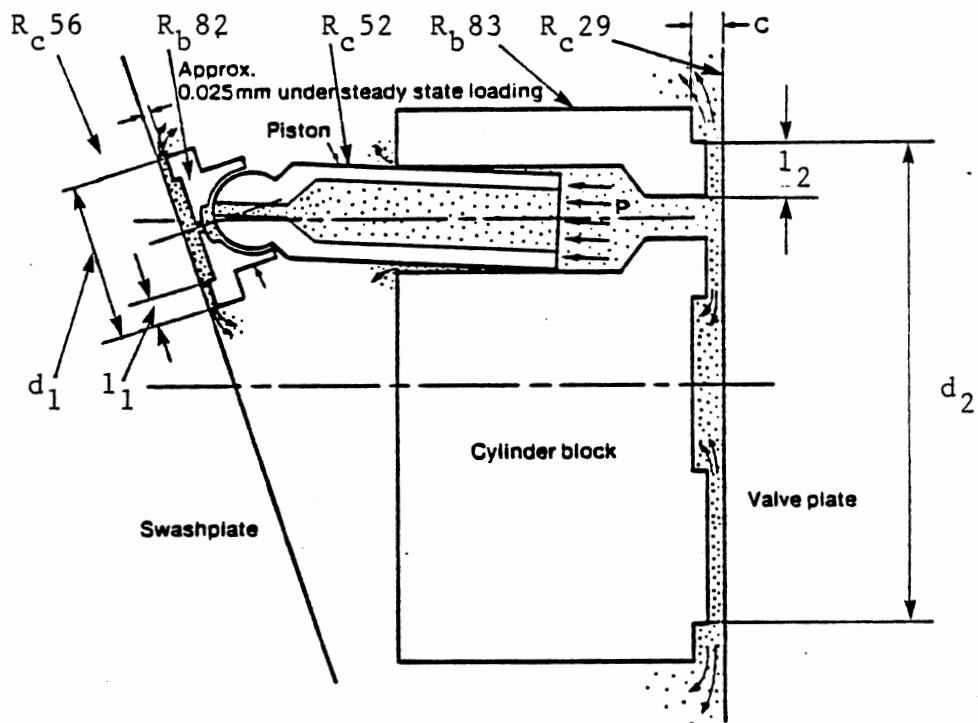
Parts Hardness and Clearances in a Axial Piston Pump
